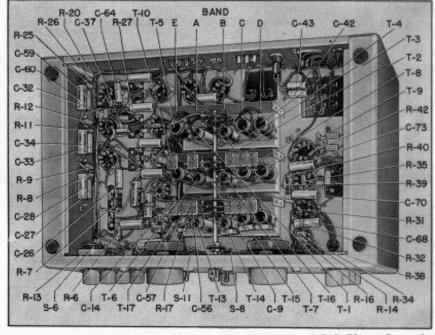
Bottom View of Receiver, Coil Compartment Side Plates Removed.
